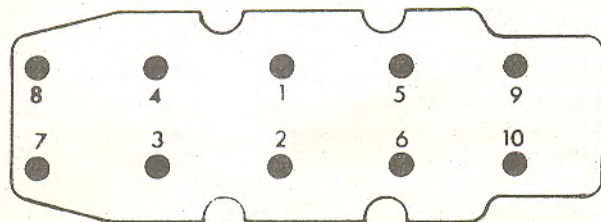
Tightening sequence for the cylinder head bolts. The bolts are slackened in reverse order starting at "10".
